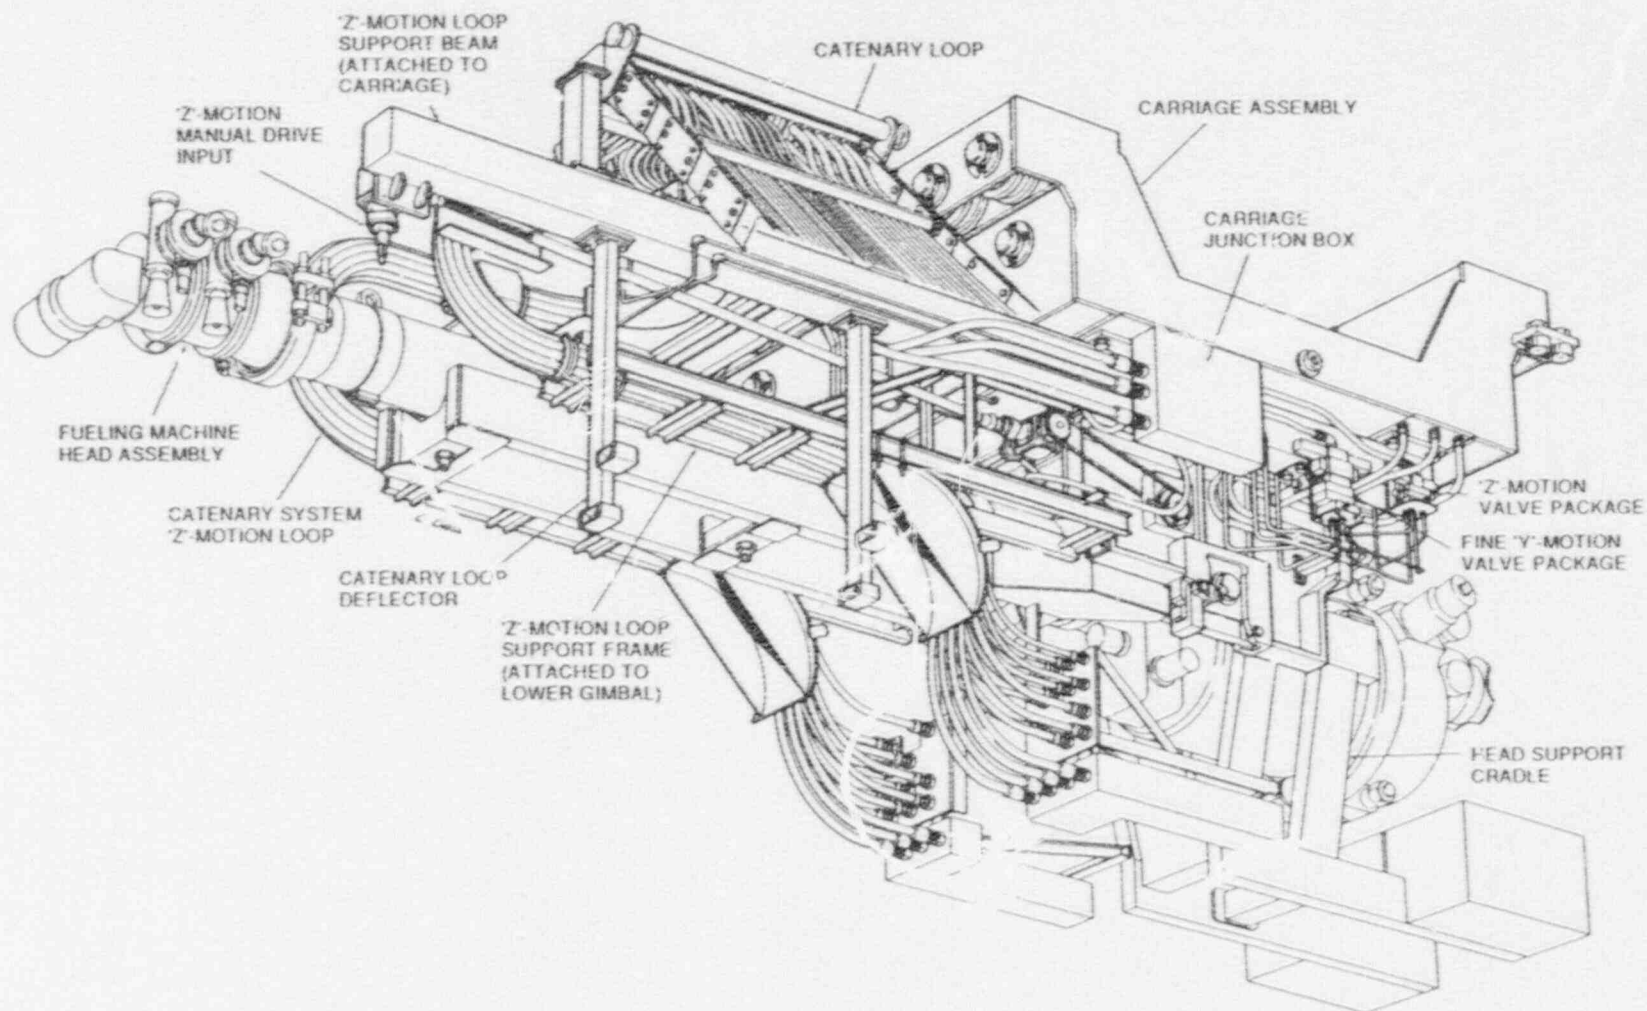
CARRIAGE/FUELING MACHINE ASSEMBLY
